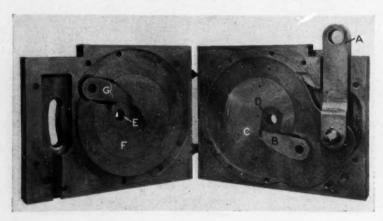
The patented gripping and shearing mechanism of the Reactron bar shearing machine
